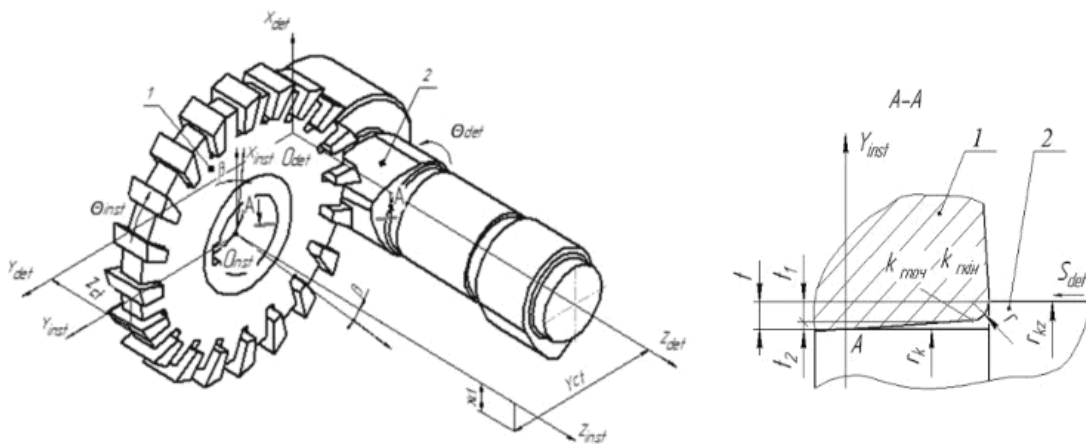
Milling of the camshaft with crossed axes of the tool and the part
